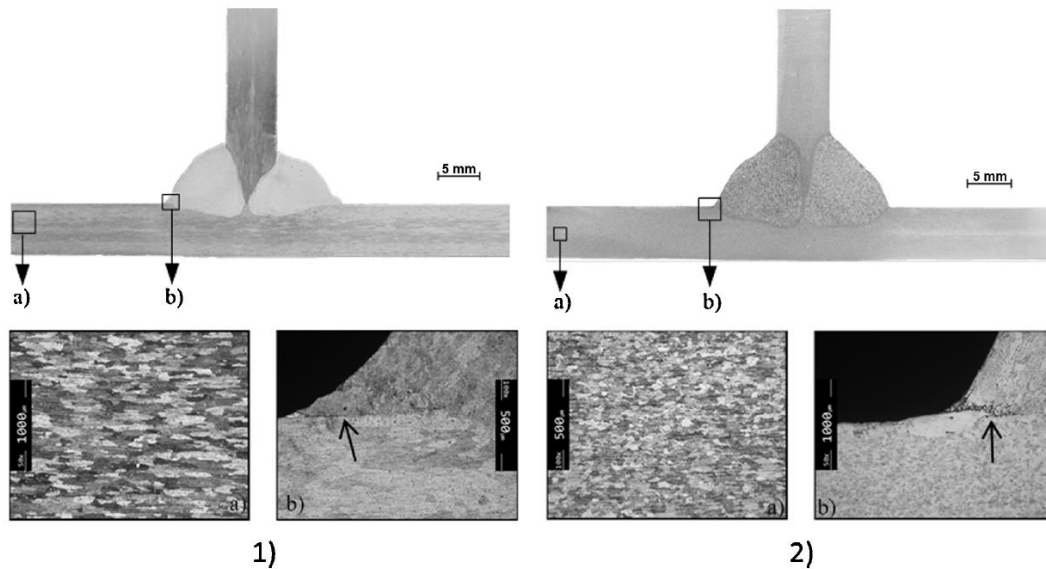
Macrographs and micrographs of MIG welds made on aluminium alloys: (1a) AA 6082-T651 microstructure; (1b) weld toe; (2a) 5083-H111 microstructure; (2b) weld toe.
